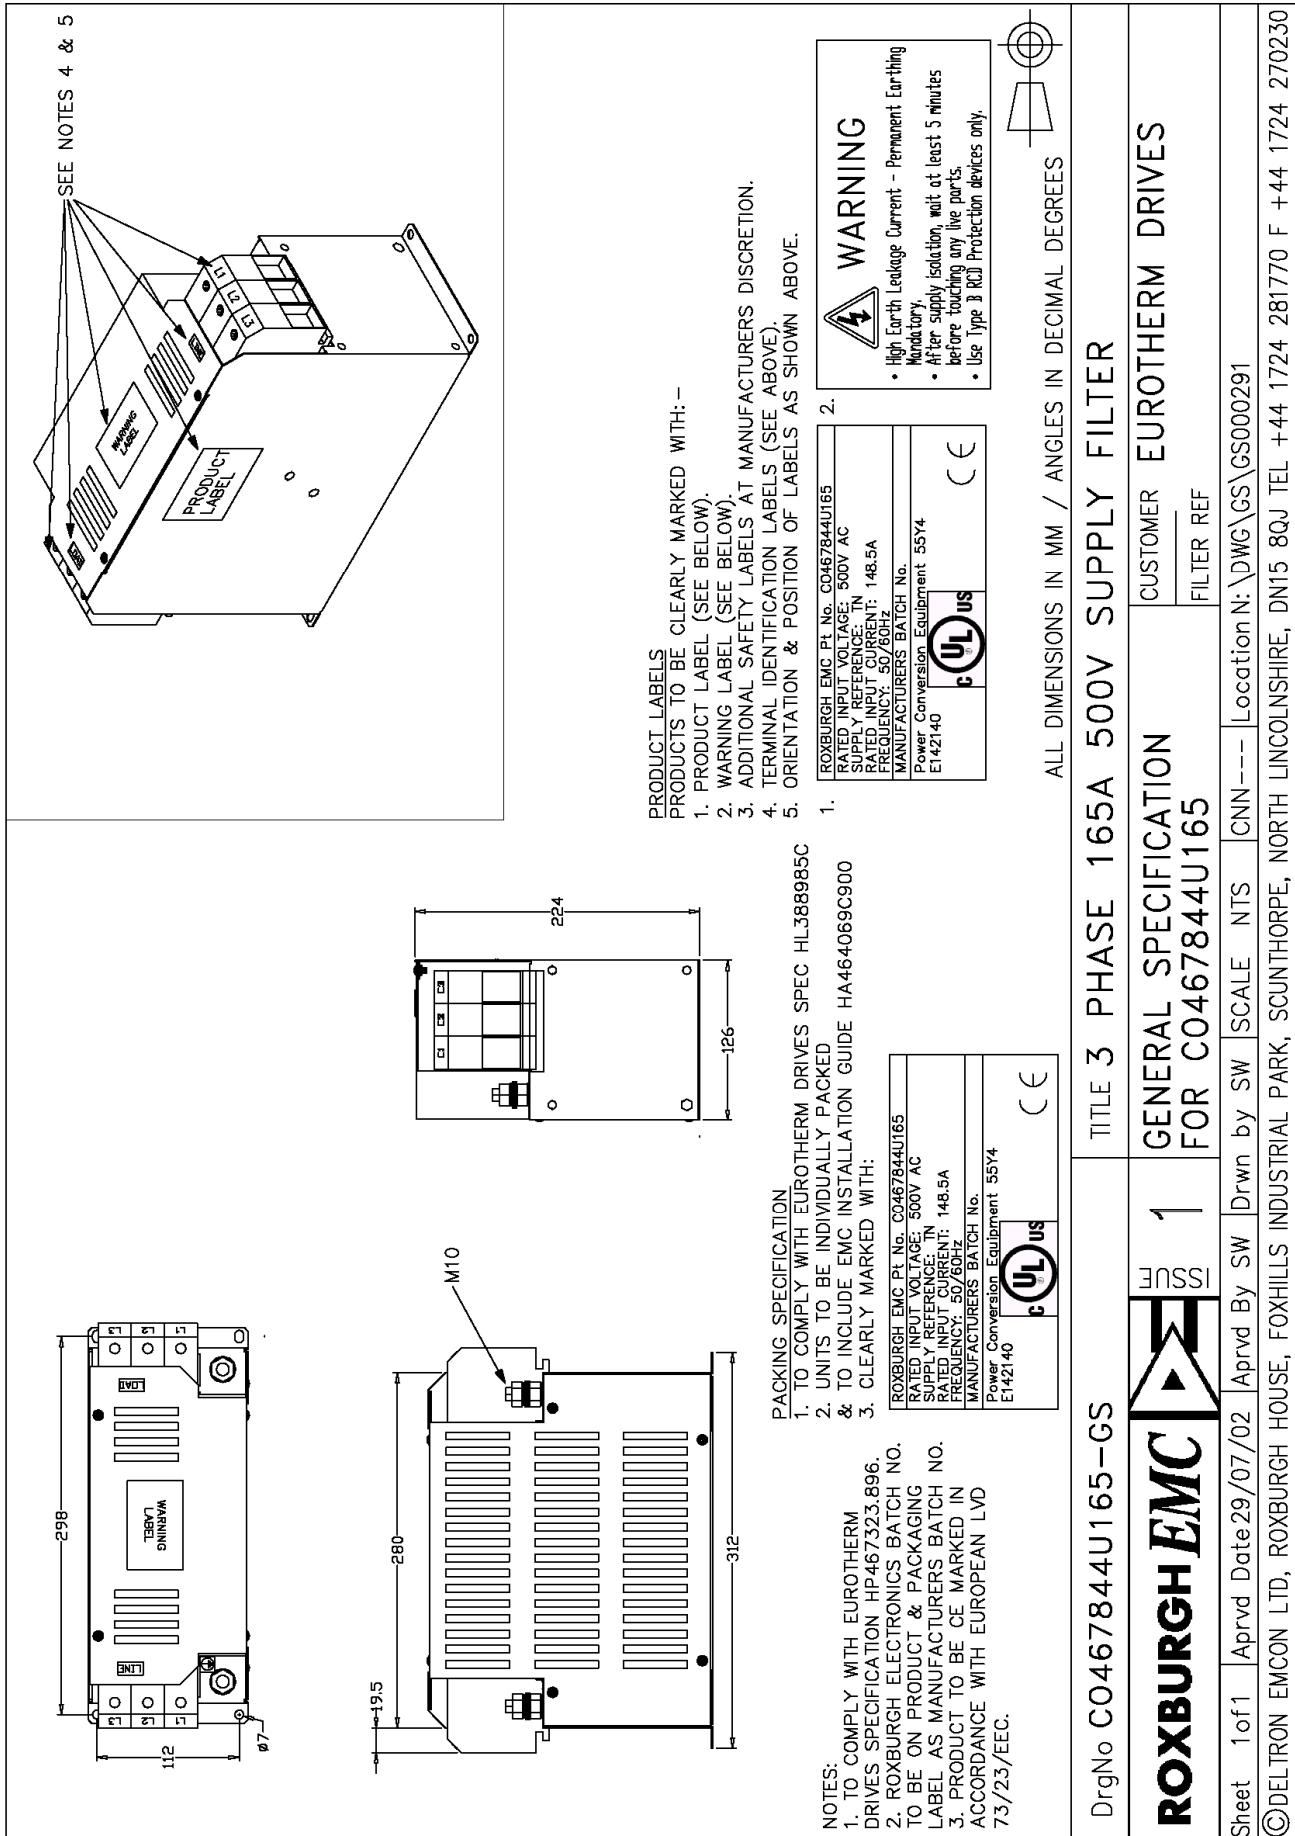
Filter Mounting Details, Part No. CO467844U165 for Frame 2 : 165 Amp
